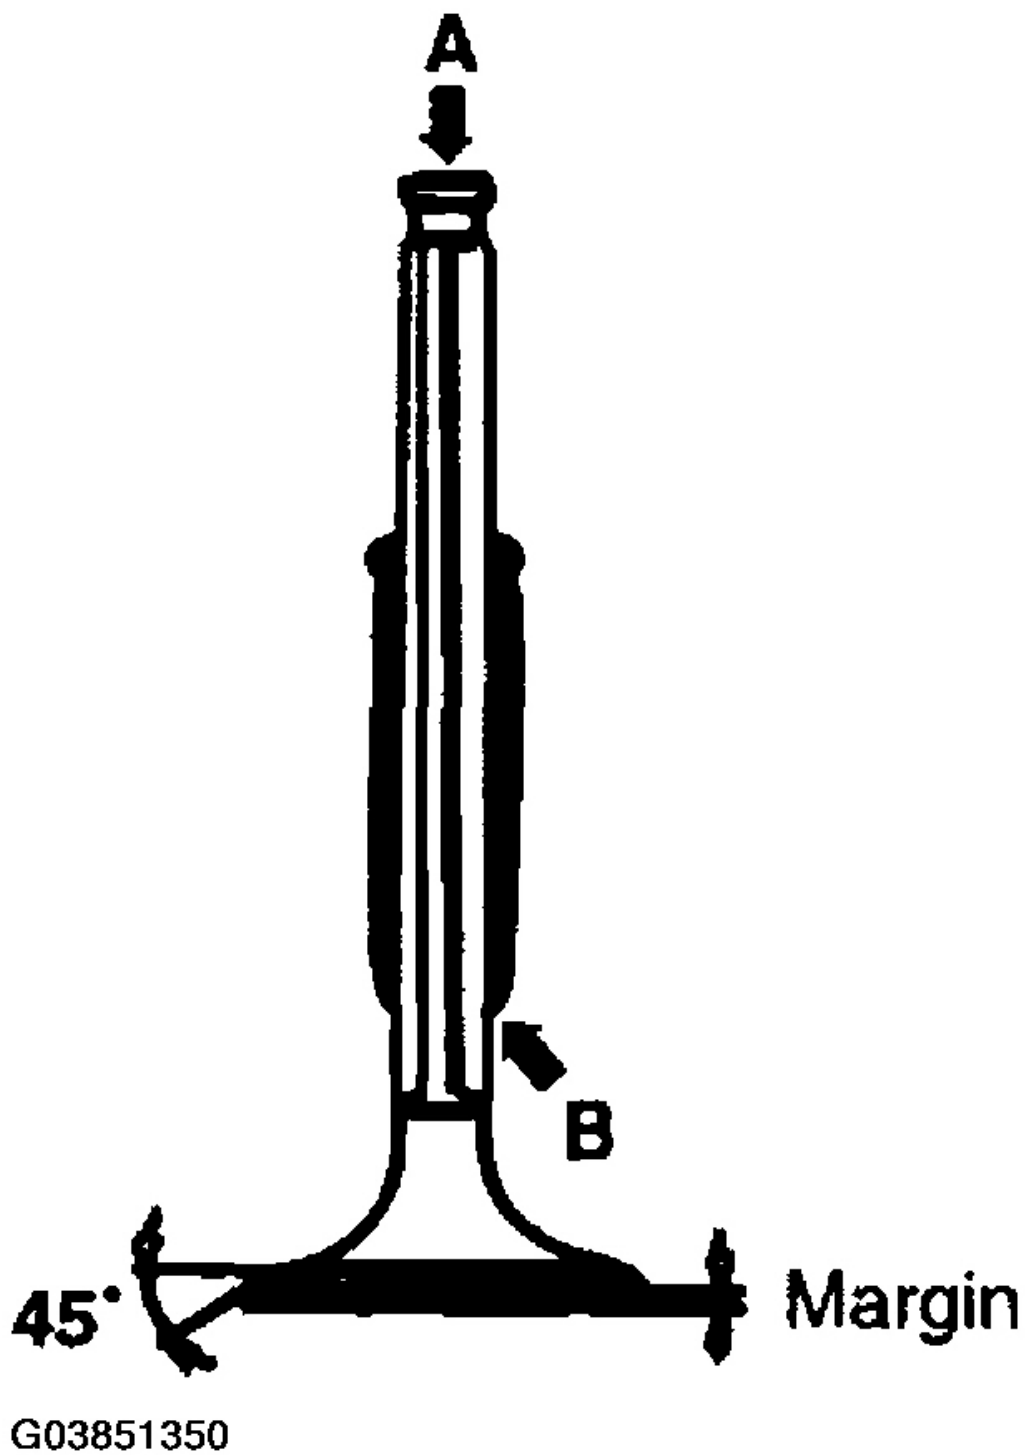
Inspecting Valve For Wear, Damage And Distortion Of Head And Stem And Stem End
